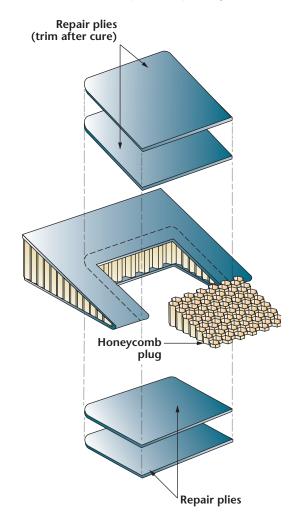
Trailing edge repair using a honeycomb filler plug.
